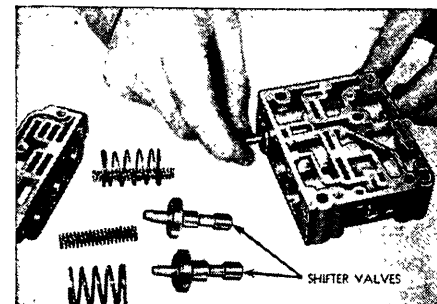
Remove shift valves and springs. Governor plugs may be removed by bumping valve body on palm of hand. Remove regulator plugs by bumping front valve body on hand
